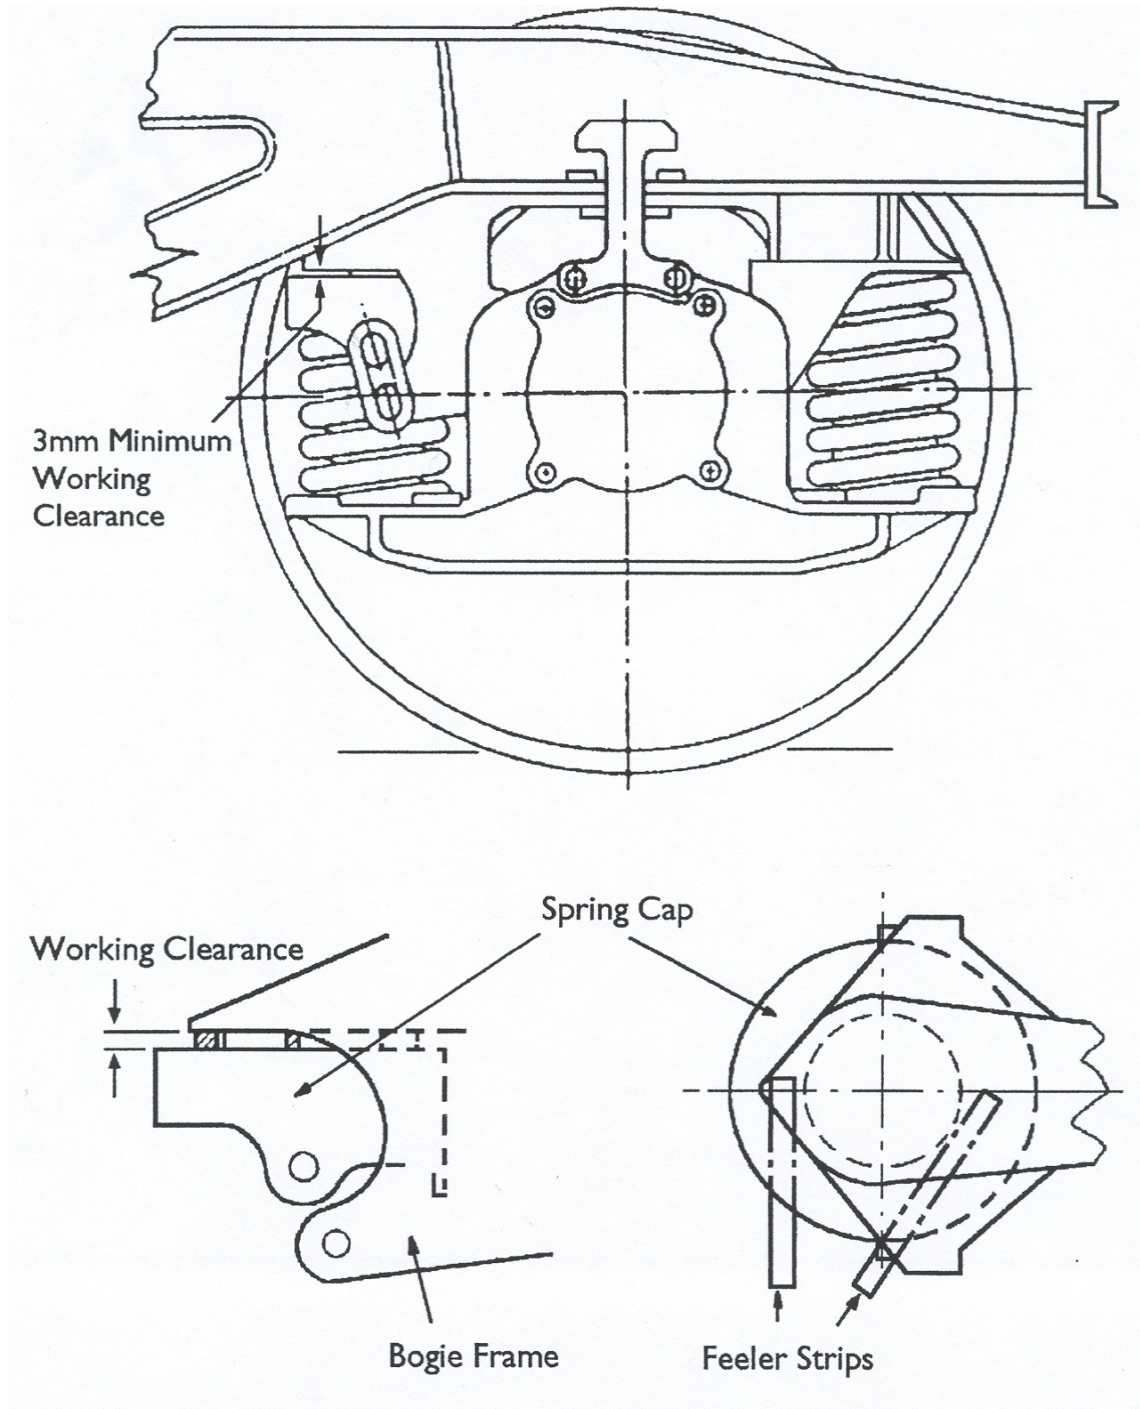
FABRICATED BOGIE FRAME – MINIMUM CLEARANCE
